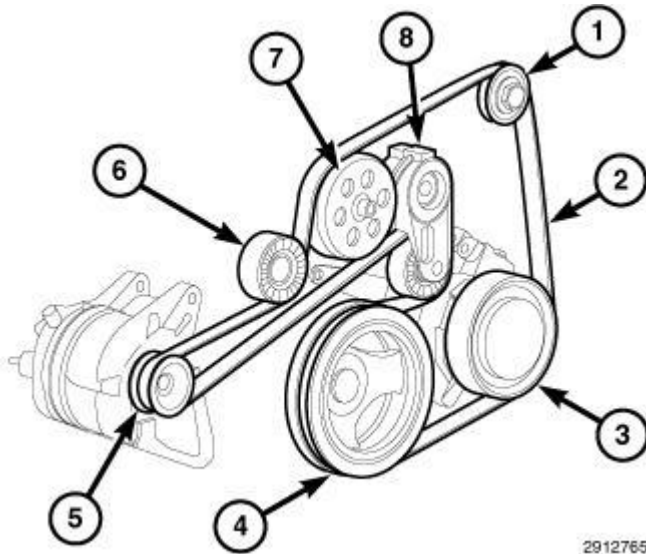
Drive Belt Tensioners & Assembly With Drive Belt Routing
